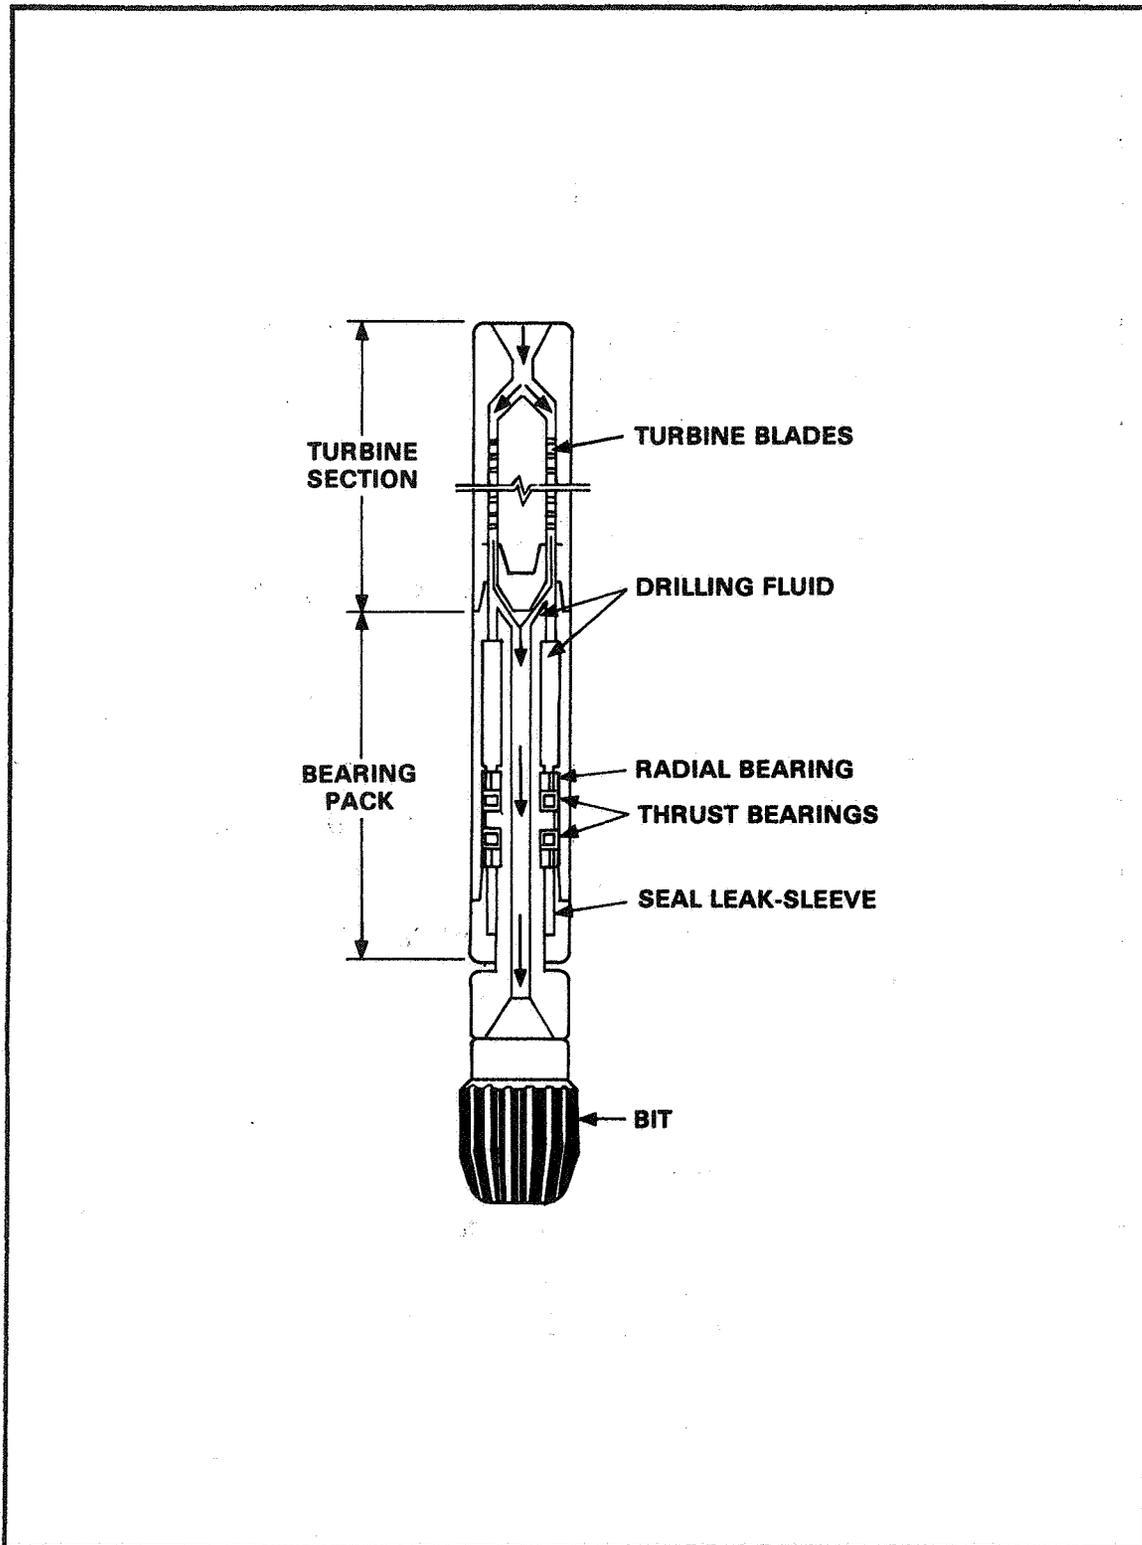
Turbodrill Schematic - Flow-Through Bearing Pack
